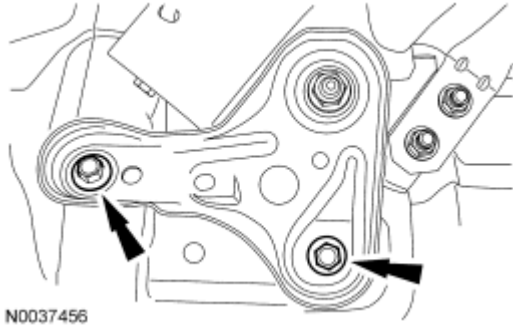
Locating Subframe Bracket-To-Body Bolts
